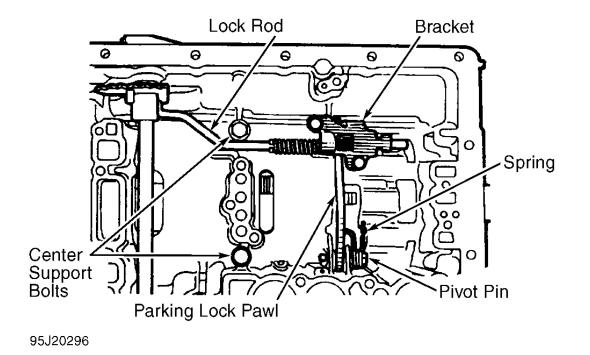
Removing Parking Lock Pawl Components Courtesy of MITSUBISHI MOTOR SALES OF AMERICA.
